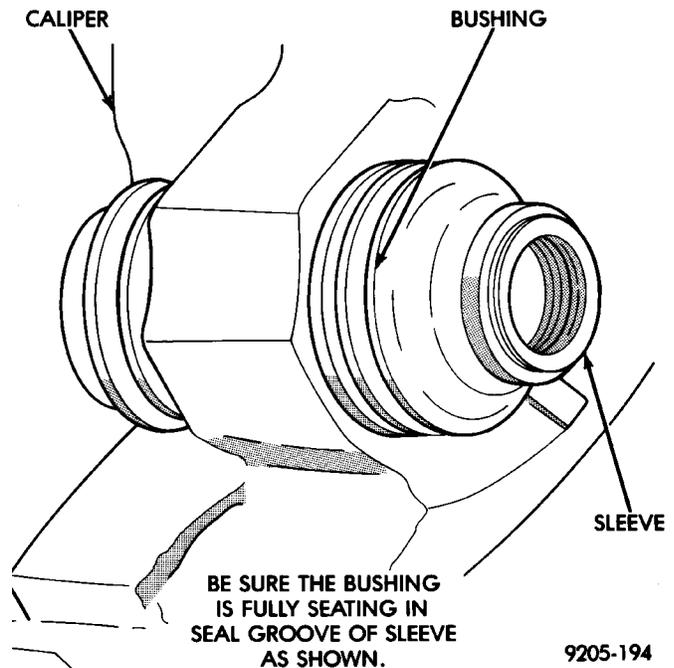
Correctly Installed Caliper Sleeve And Bushing
